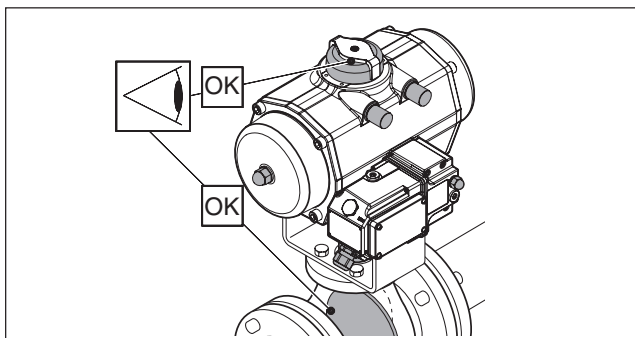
Check proper mounting before connecting air supply and electrical wiring.
